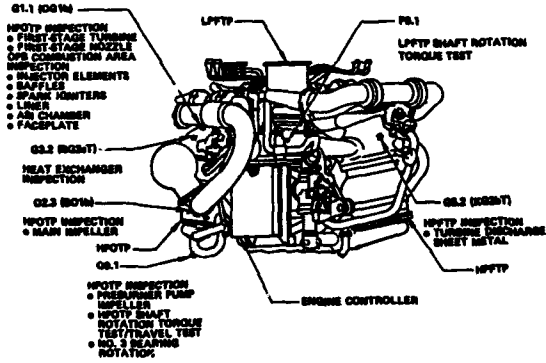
Internal Inspection Points on the Fuel Inlet Side of the SSME.
